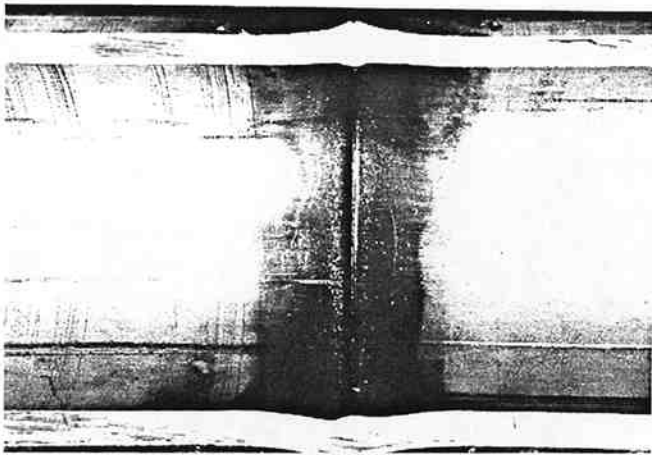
Longitudinal section through 4-in. diameter type 304 stainless steel pipe
